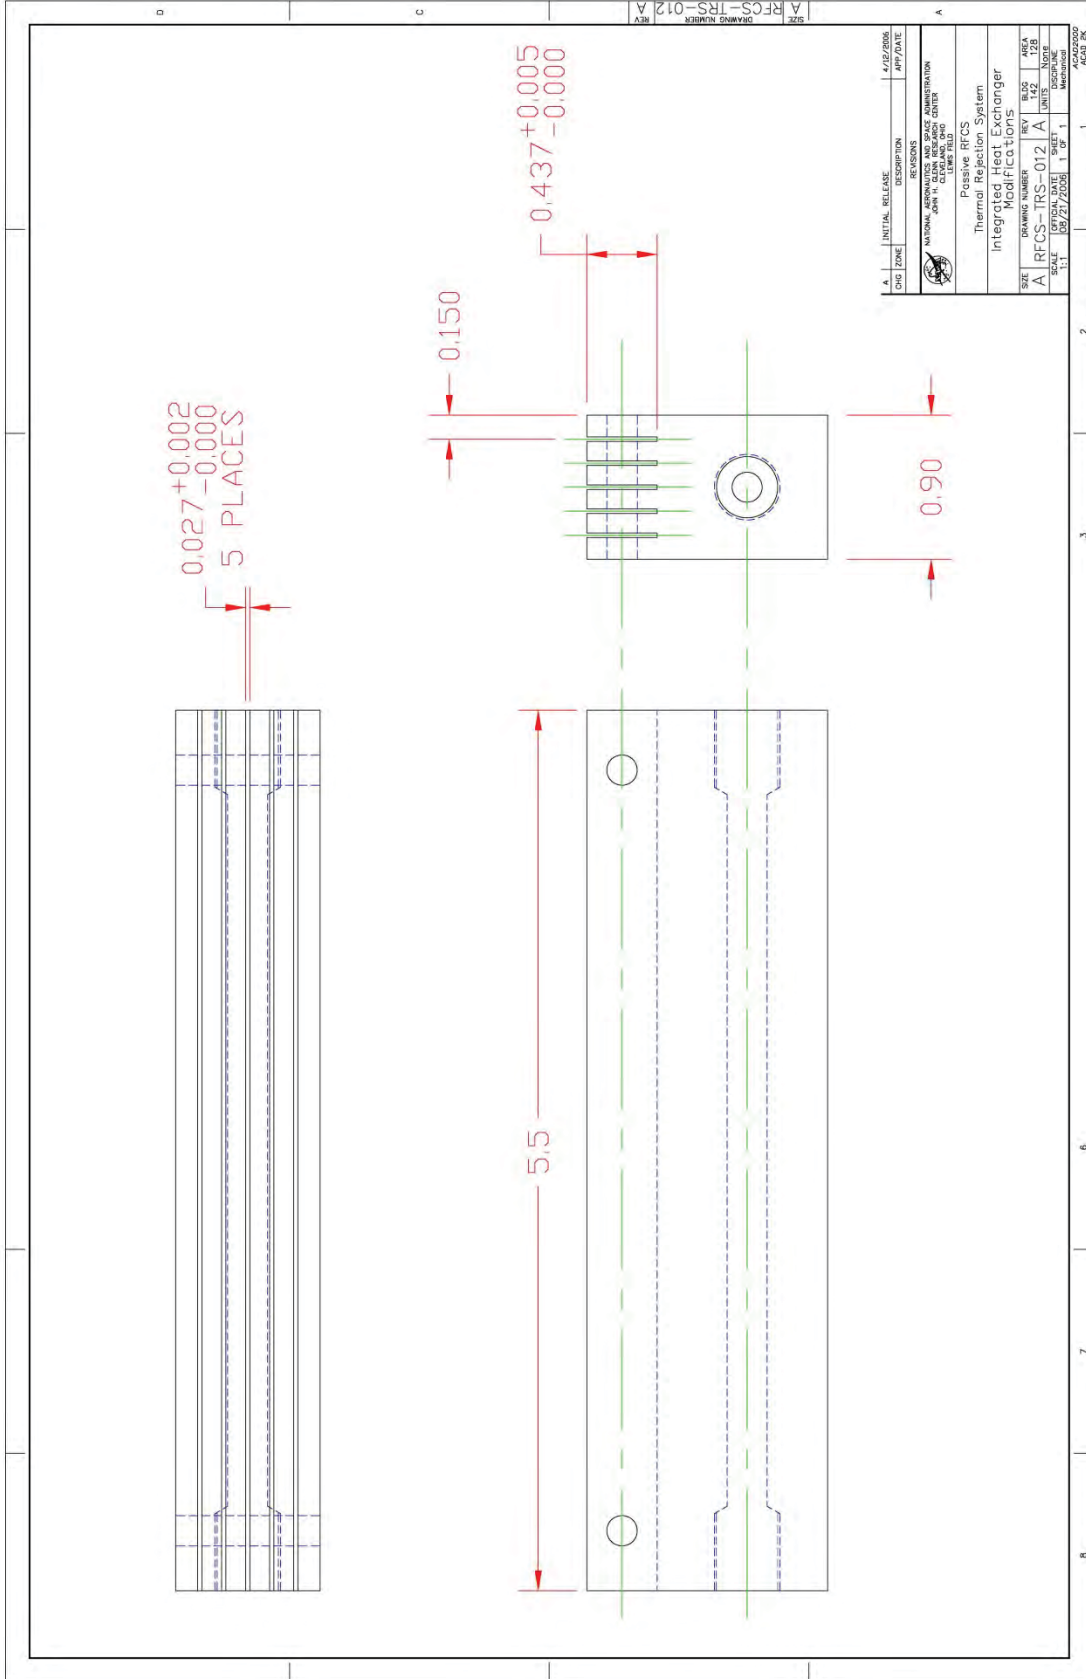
Metal Manifold Design Drawing for Use with TPG Cooling Plates
